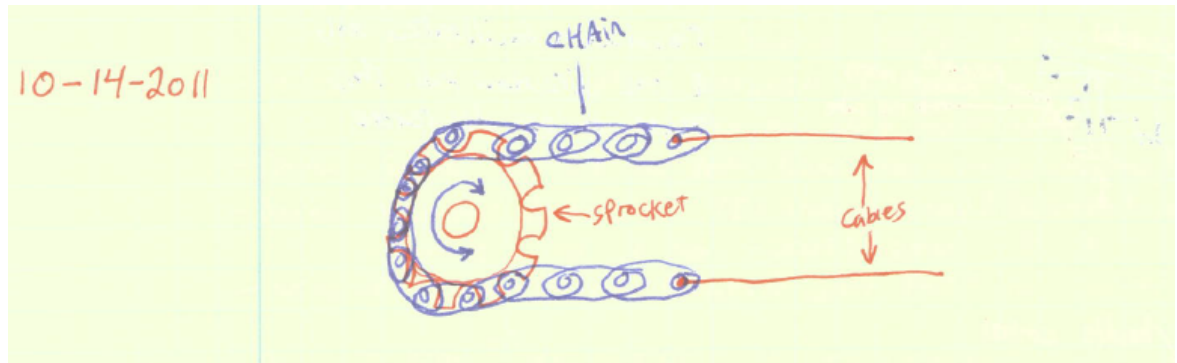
Hand-controlled, chain and sprocket actuated cable system. This design involves using a chain and sprocket in place of a rack and pinion in order to actuate a set of cables.
